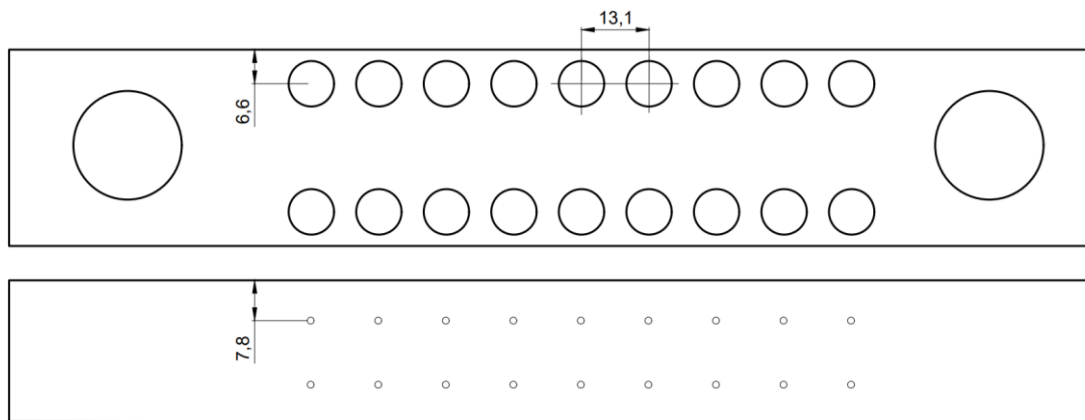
Setup of series of holes for experimental campaign. The two lateral holes were present to enable the fixing of the workpiece on the machine tool.
